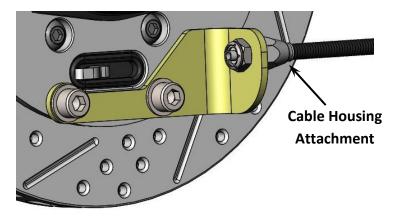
Cable Housing Attachment (ALL Legend Series Rear Disc Brake Kits)
